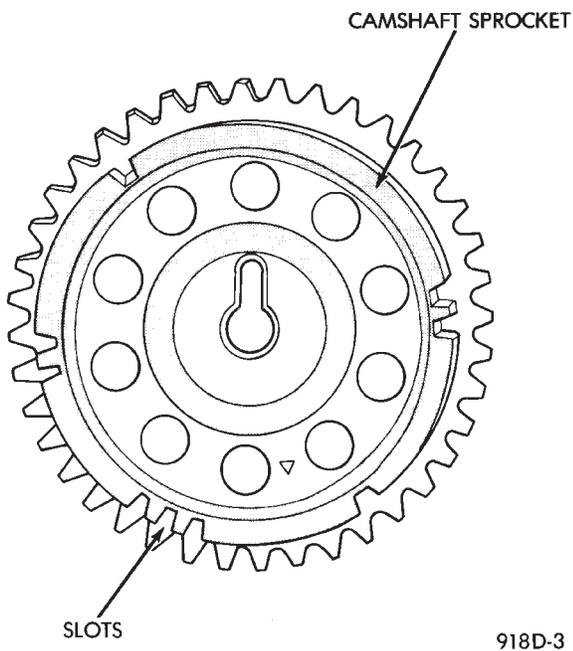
Camshaft Sprocket—3.3L and 3.8L Engines
